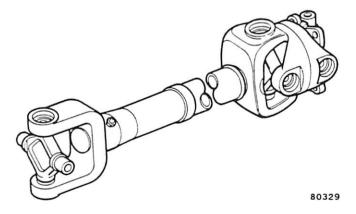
E-1 Front Propeller Shaft Assembly-Cherokee, Wagoneer and Truck Models
